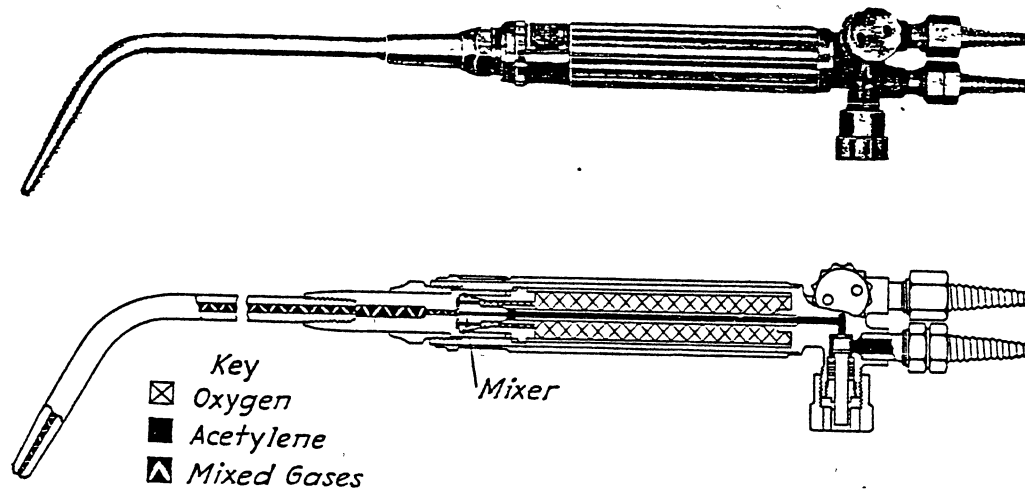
Schematic of the Welding Torch Used for Diamond Synthesis [108]
